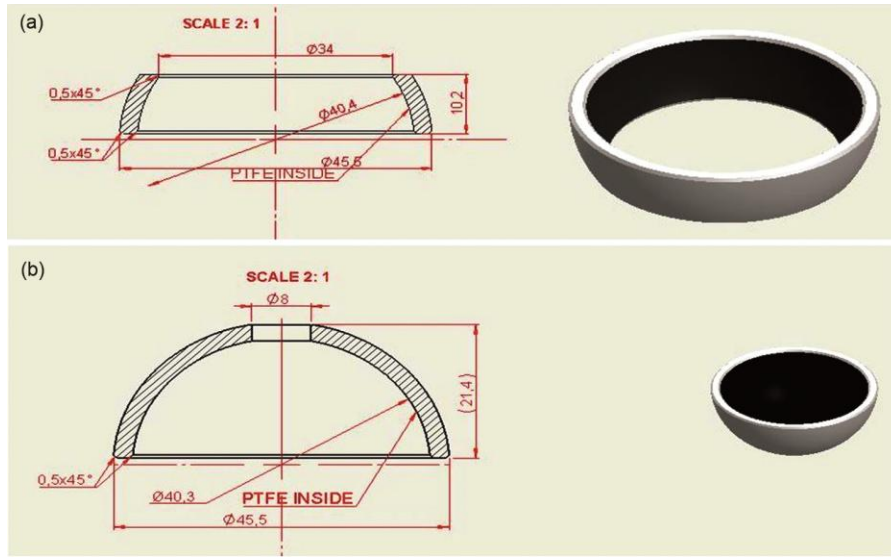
The technical drawing of steel/PTFE (a) lower and (b) upper bearings.
